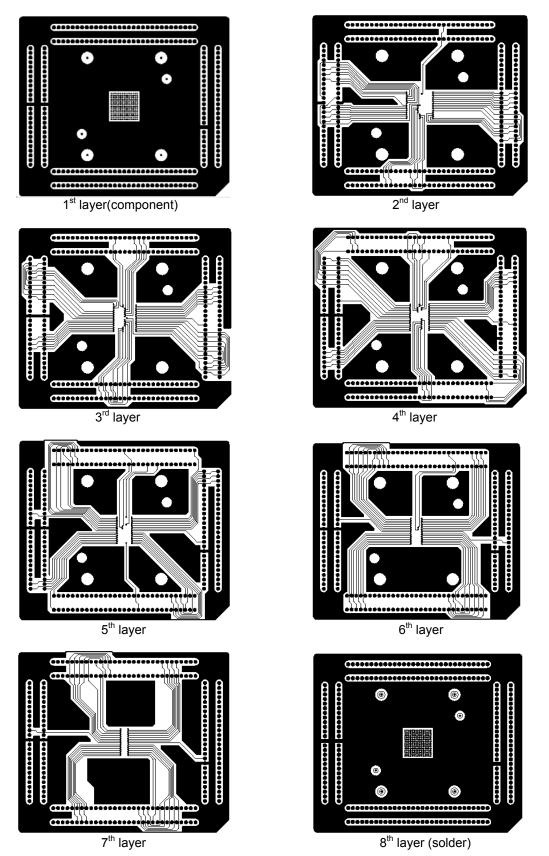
PCB Pattern of the Power Dissipation Measuring Board
